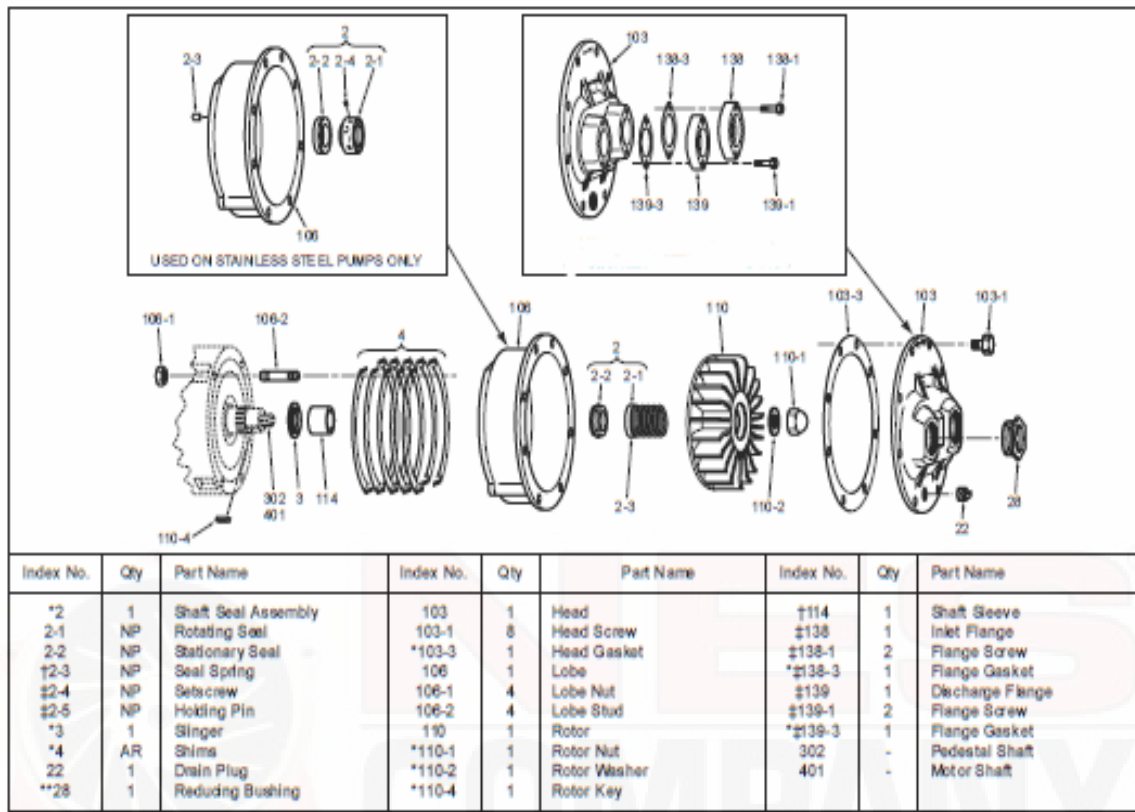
Exploded View of NES NHF 50, 80 and 120
